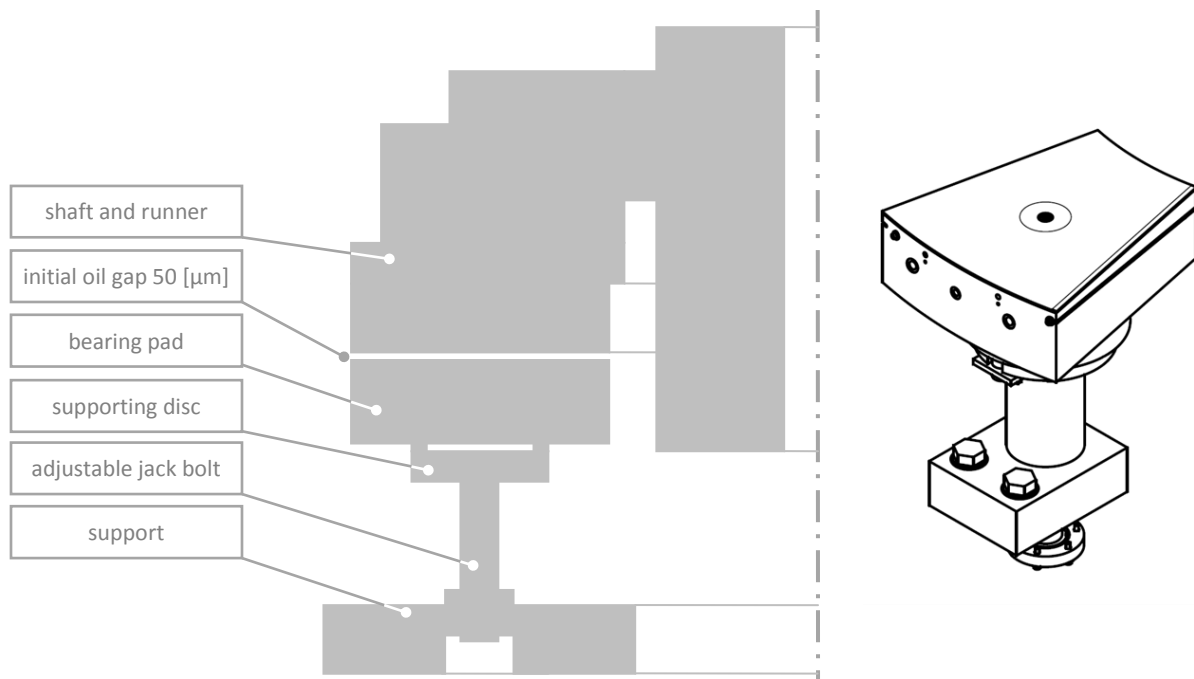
Support system of a thrust bearing, sketch and 3D model of the real thrust pad, initial gap between pad and runner is set to 50 μm
